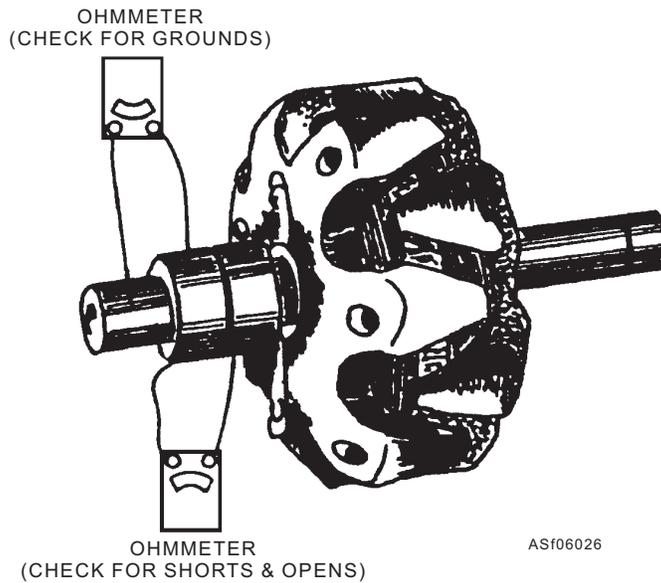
Testing the rotor for grounds, shorts, and opens.
